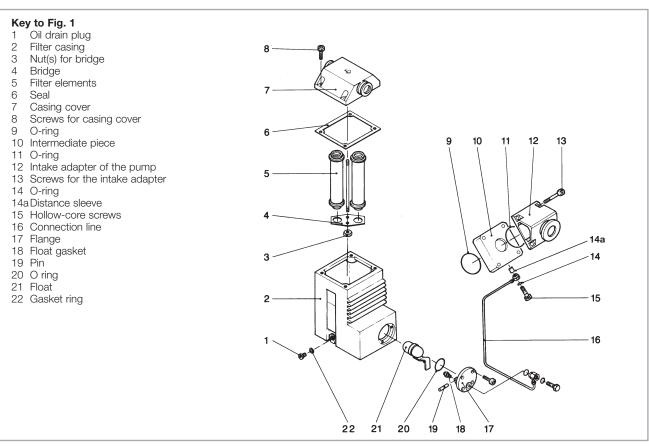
Exploded diagram of AR 40-65 (AR 4-8 and AR 16-25 are similar)
